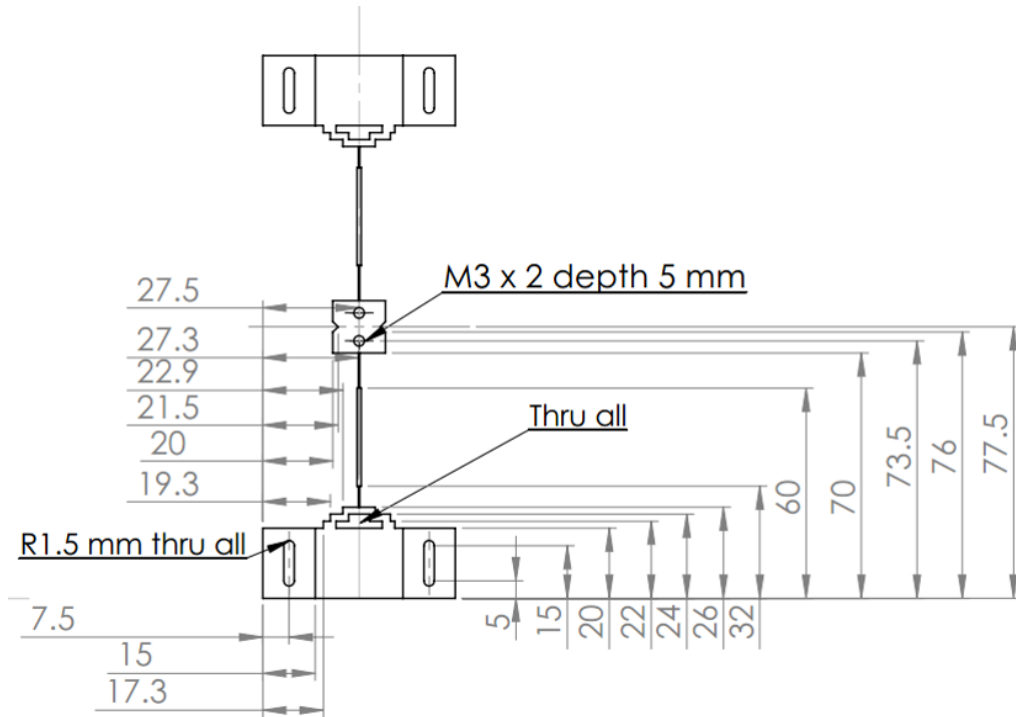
The 2D CAD drawing for the synthesized compliant PR joint. The units for all the dimensions are in millimeters and the thickness of the joint is 10 mm.
